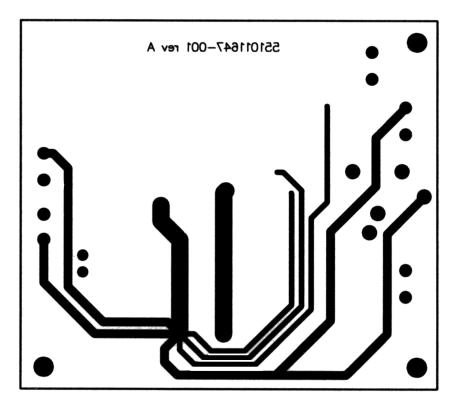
Recommended MM PC Board Layout: Bottom-Side Layout
